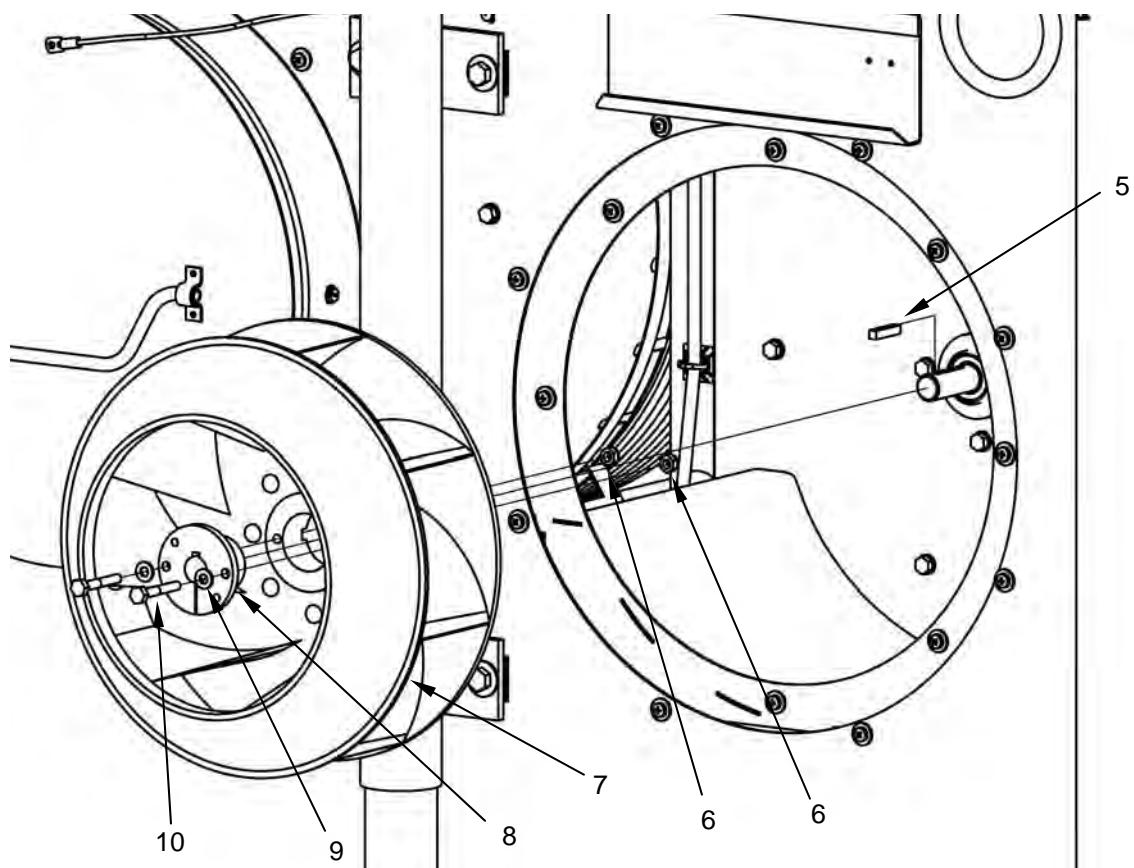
Assembly, Inlet Fan (Sheet 2 of 3).
